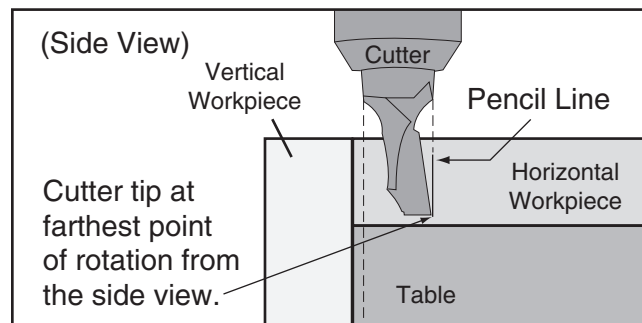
Cutter position to set cutter depth stop (viewed from the side).
